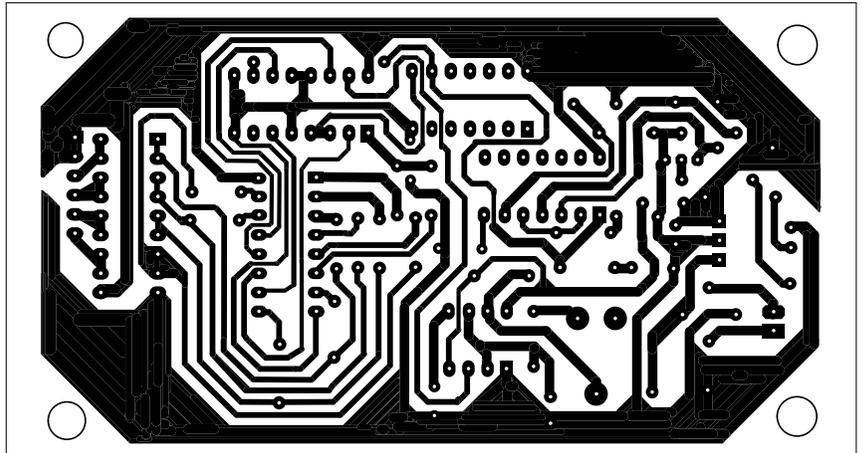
Actual-size, single-side PCB for IR receiver-cum-stepper motor driver circuit
